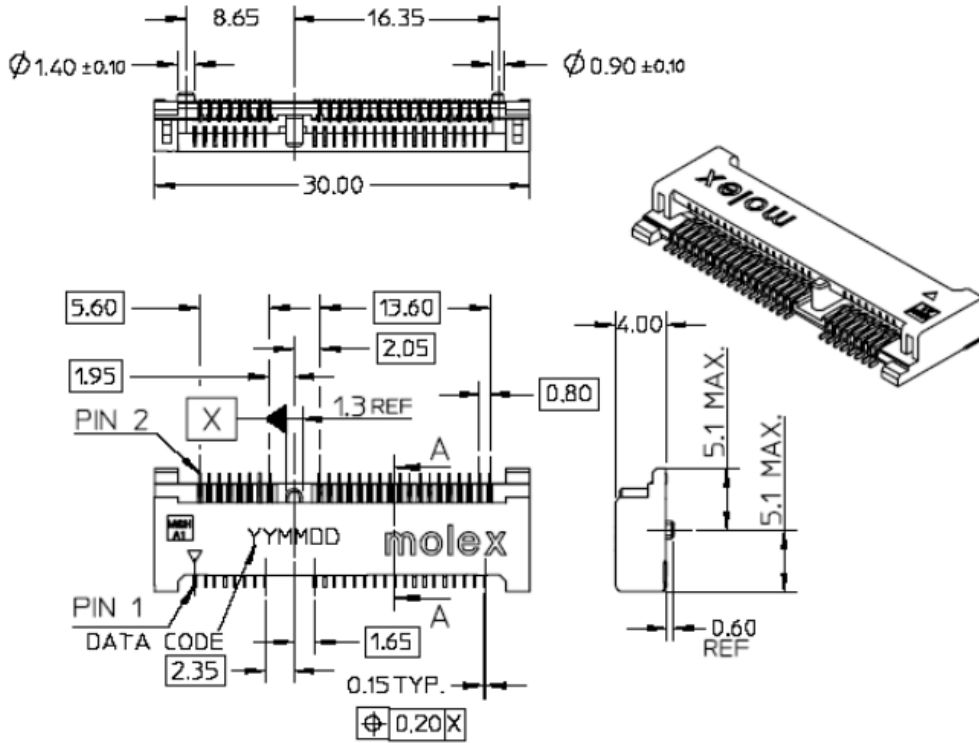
Dimensions of the Mini PCI Express Connector (Molex 679100002)
